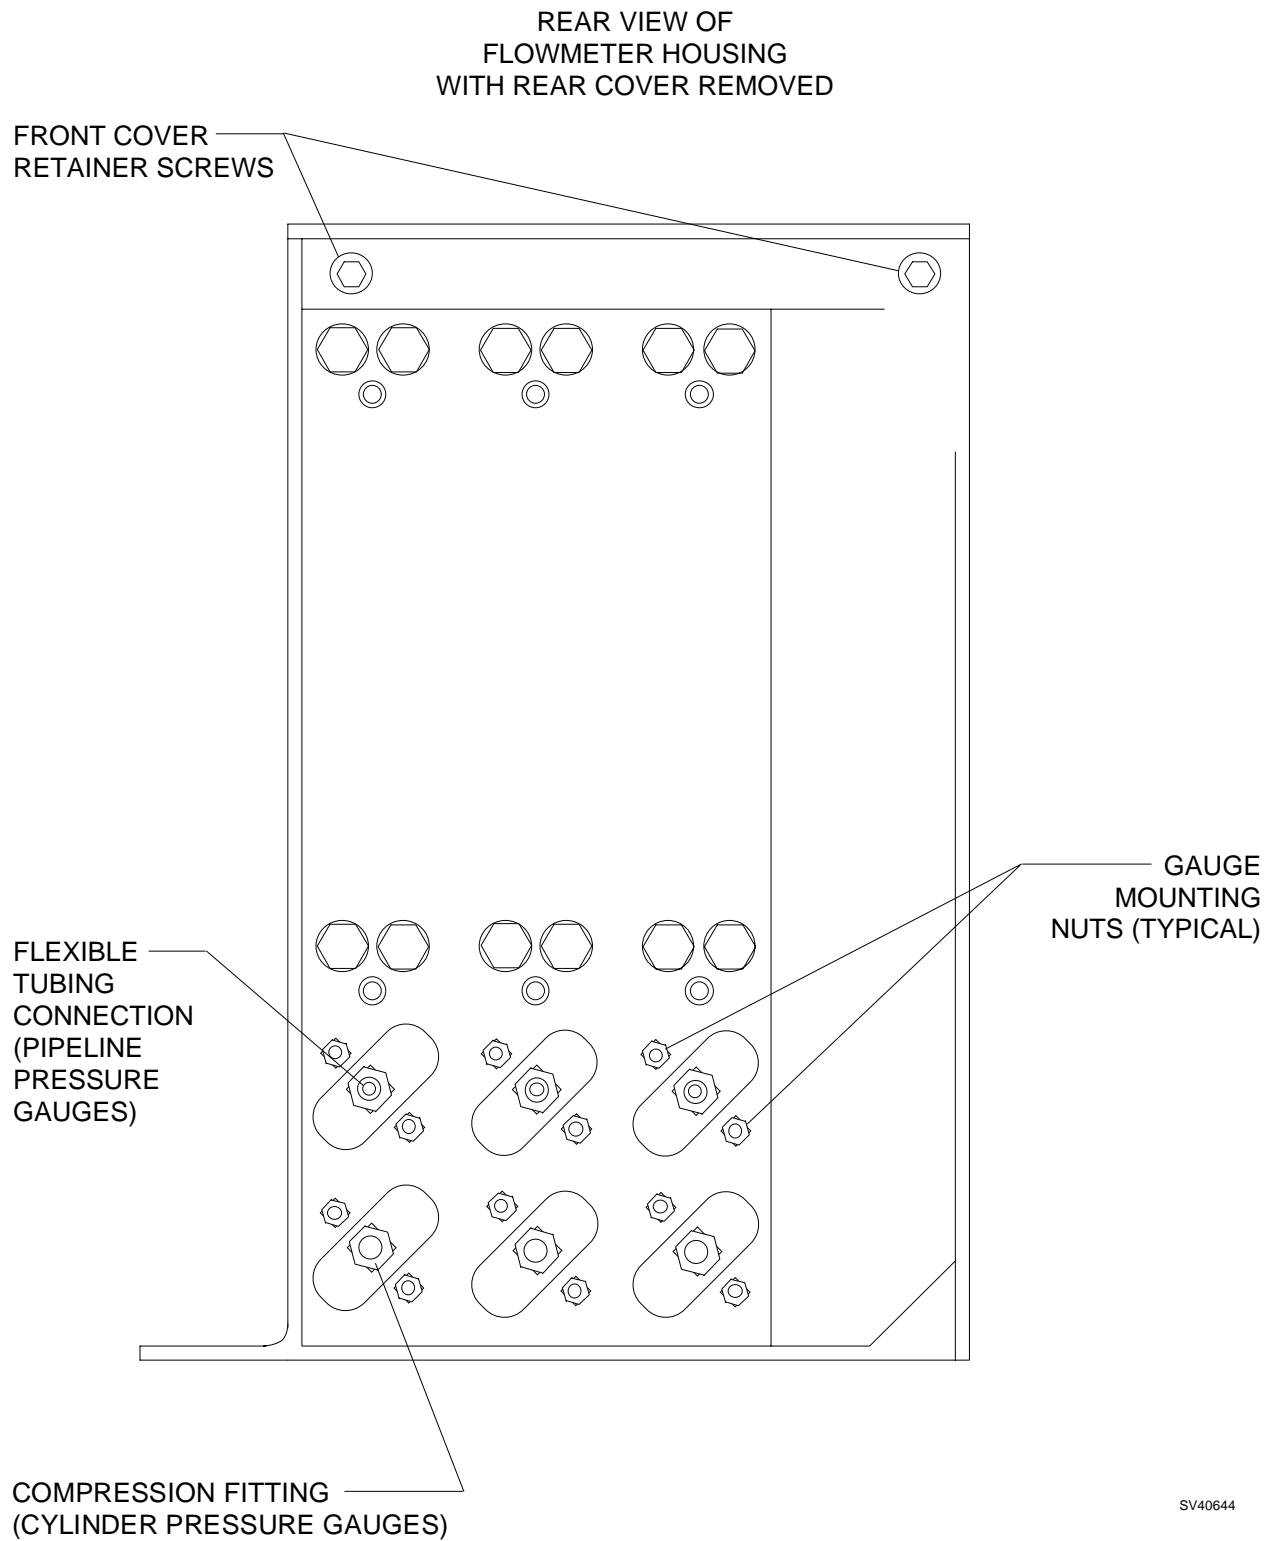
CYLINDER AND PIPELINE PRESSURE GAUGES
